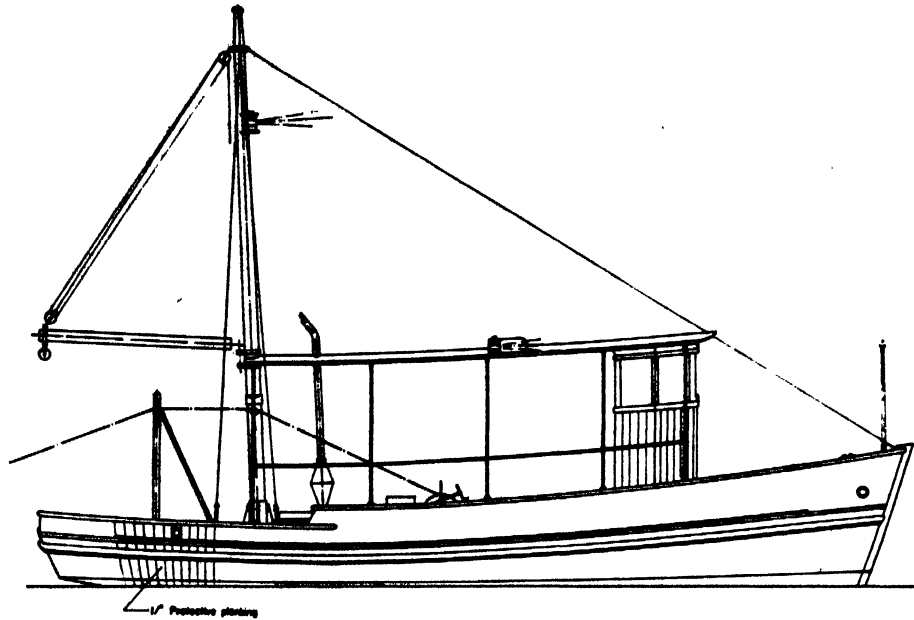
32 ft. (9.75 m.) multi-purpose fishing boat with layout for trawling
